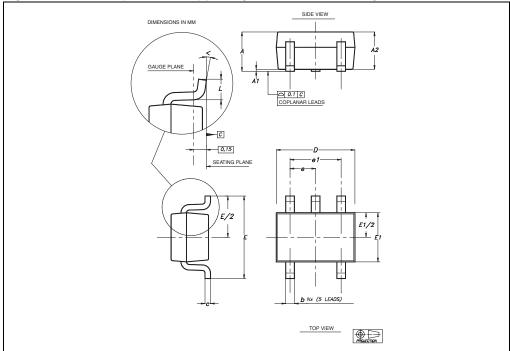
SC70-5 (or SOT323-5) package mechanical drawing
